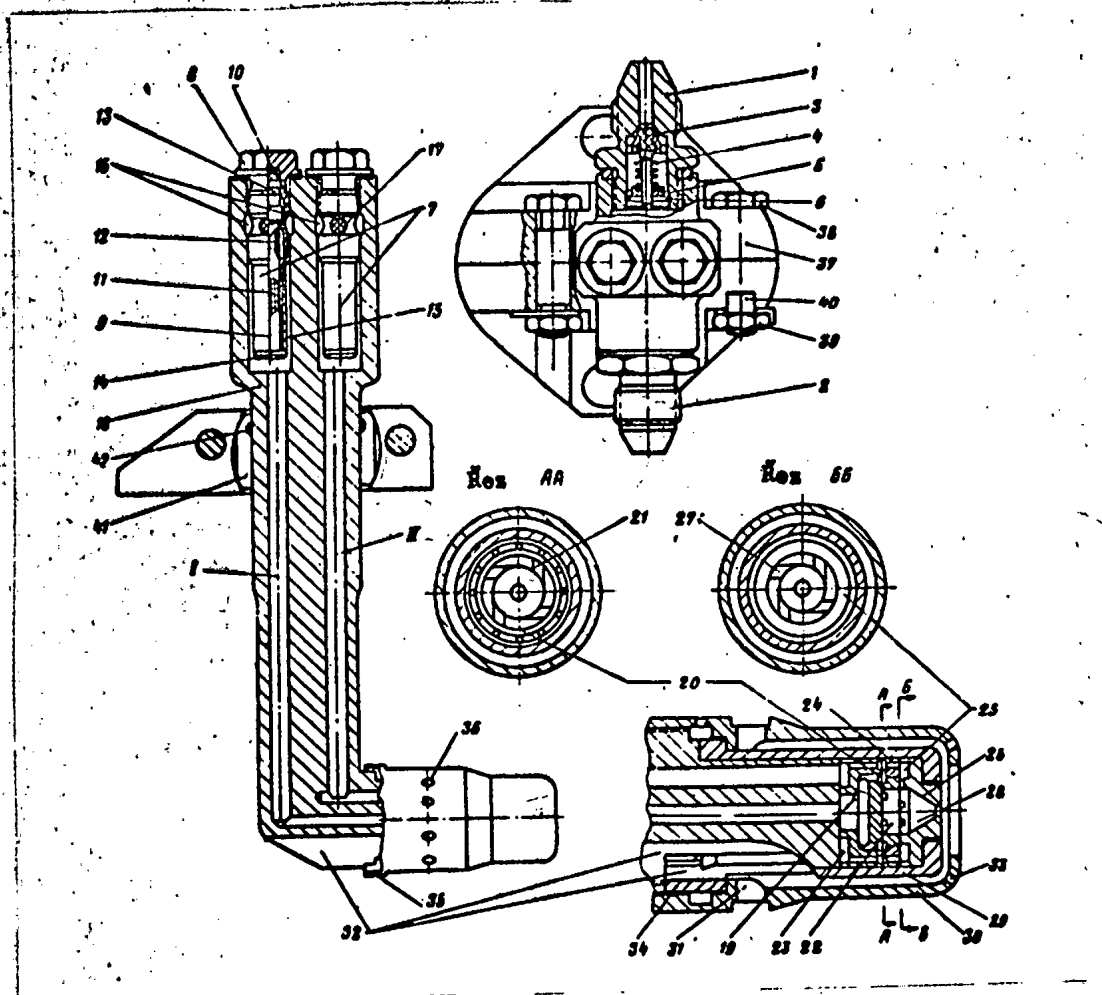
Fuel nozzle - 1, 2. Tube fittings of the return valve; 3. Rubber valve; 4. Spring; 5. Stop; 6. Set ring; 7. Filter; 8. Extension [hex head bolts for filter units?]; 9. Filter insert; 10. Pin; 11. Screen; 12. Frame; 13. Journal; 14. Bushing; 15. Casing; 16. Circular groove; 17. Opening in the tube fitting; 18. Fuel nozzle body; 19. Adapter; 20. Vortex generator of the primary circuit; 21. Four tangential grooves in the vortex generator; 22. Vortex chamber; 23. Recess in the adaptor; 24. Ring; 25. Recess in the atomizer; 26. Atomizer; 27. Four tangential grooves in the atomizer; 28. Atomizer chamber; 29. Sleeve; 30. Shroud nut; 31. Two keyways in housing; 32. Machined area on head and sleeve; 33. 12 openings around the shroud; 34. Sleeve boss; 35. Shroud shoulder; 36. Ten fuel discharge outlets; 37. Fuel nozzle flange; 38. Bolt; 39. Nut; 40. Flexible lock; 41. Ring; 42. Rubber ring
